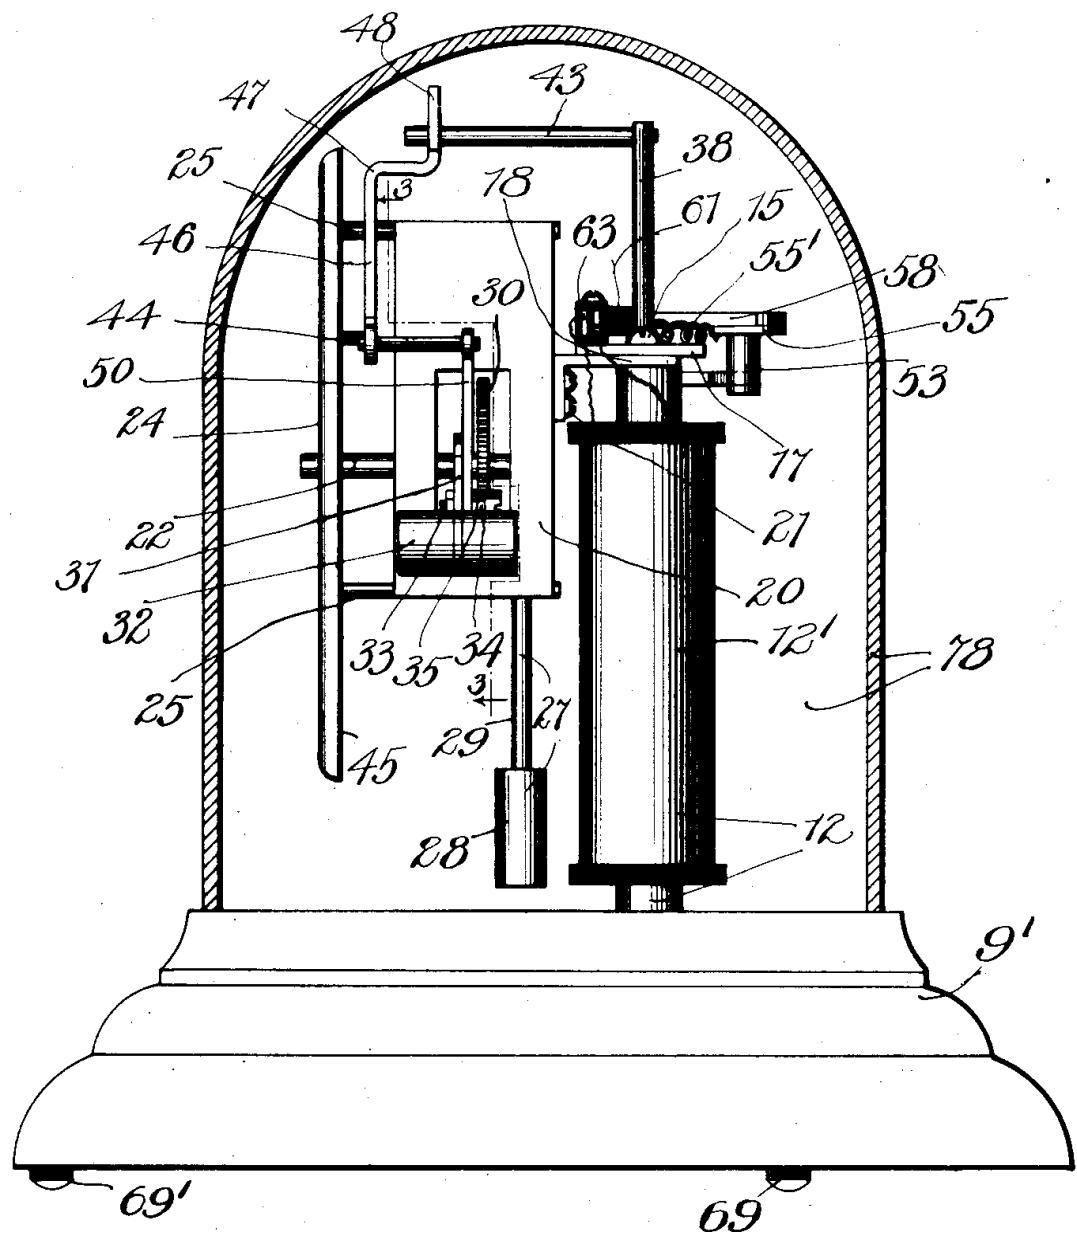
, Patent #868,696 Drawing of No-Key clock side elevation.
